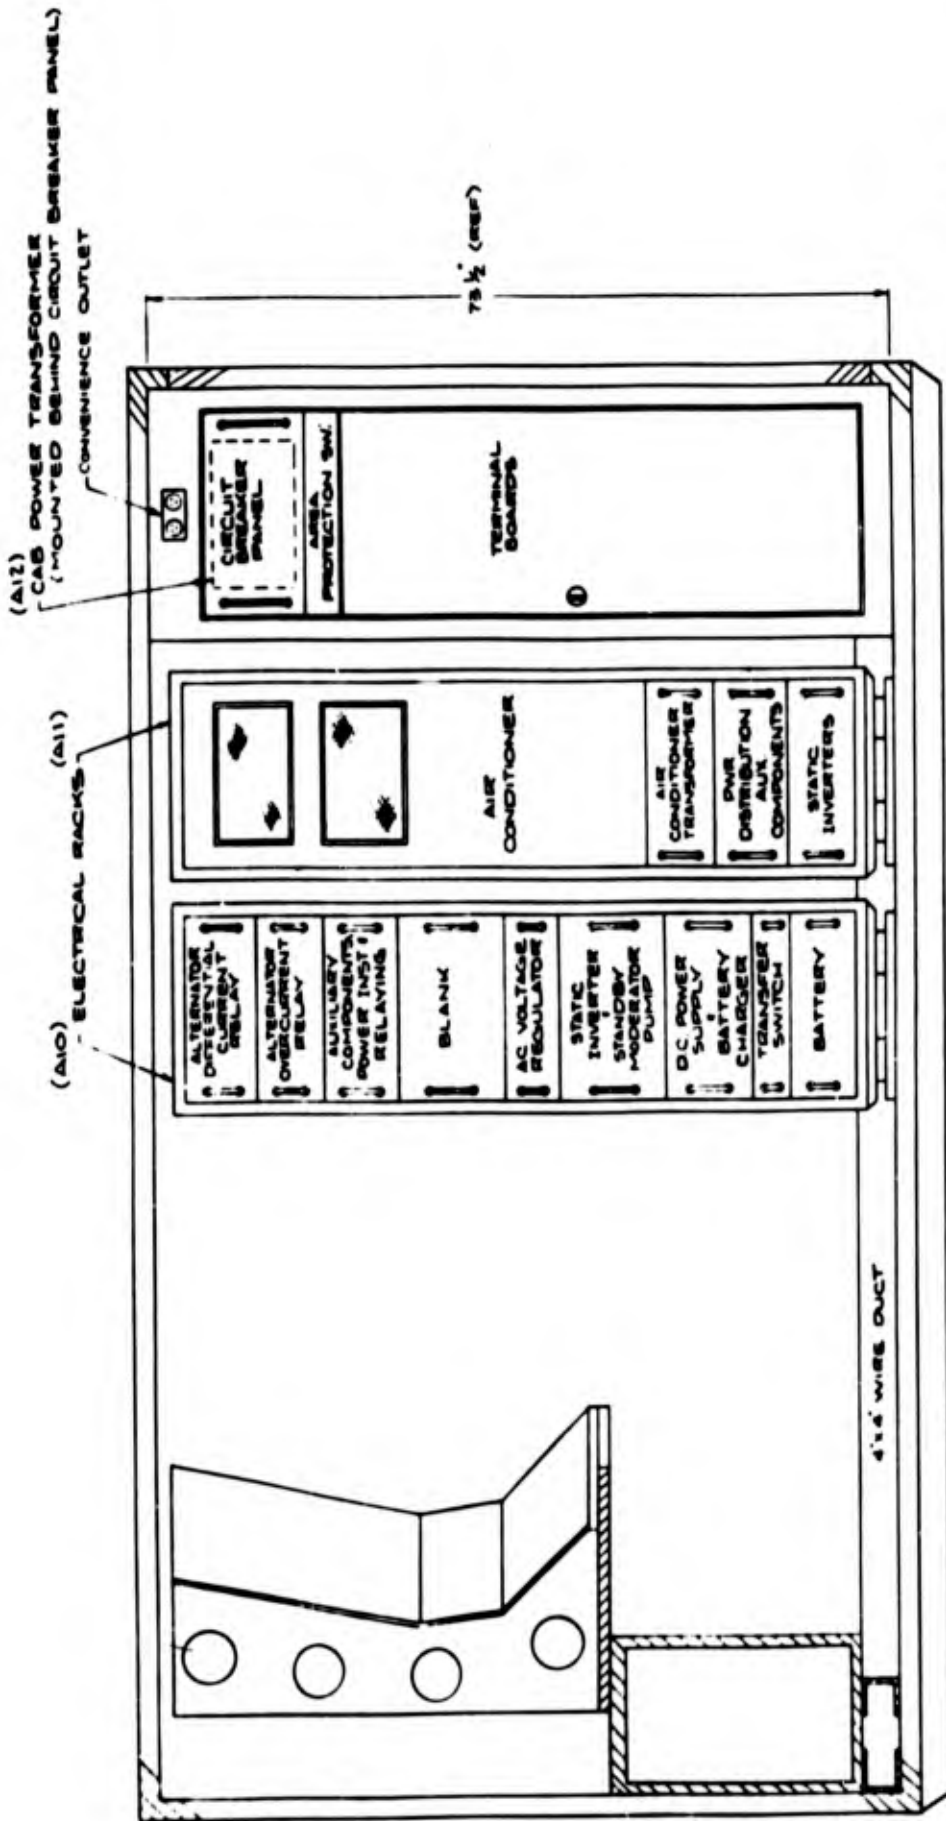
FINAL CONTROL-CAB LAYOUT -- SECTION B-B AND CONSOLE PROFILE
